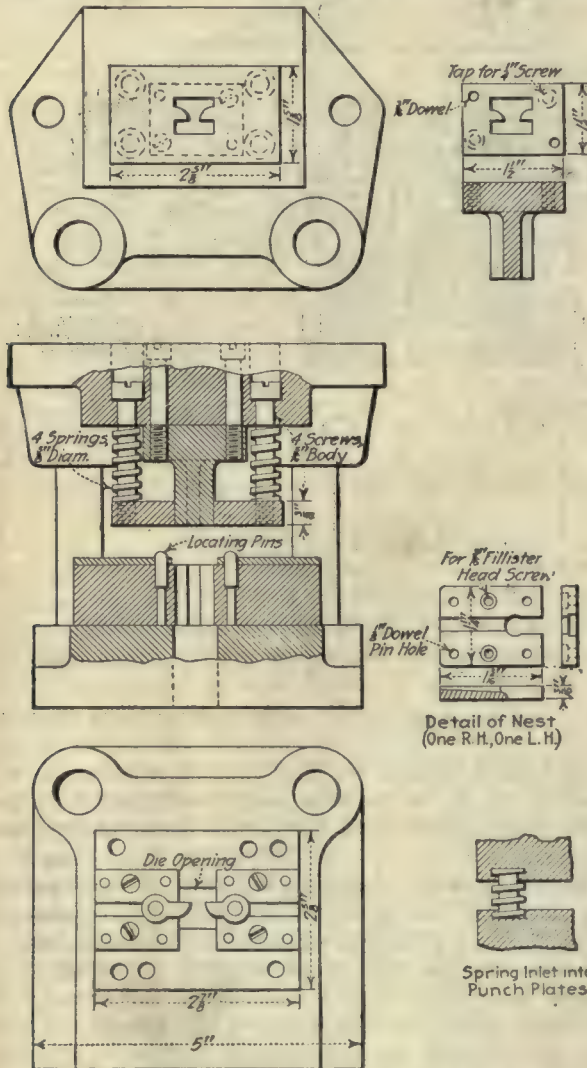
DETAILS OF TOOLS SHOWN IN FIG. 3
